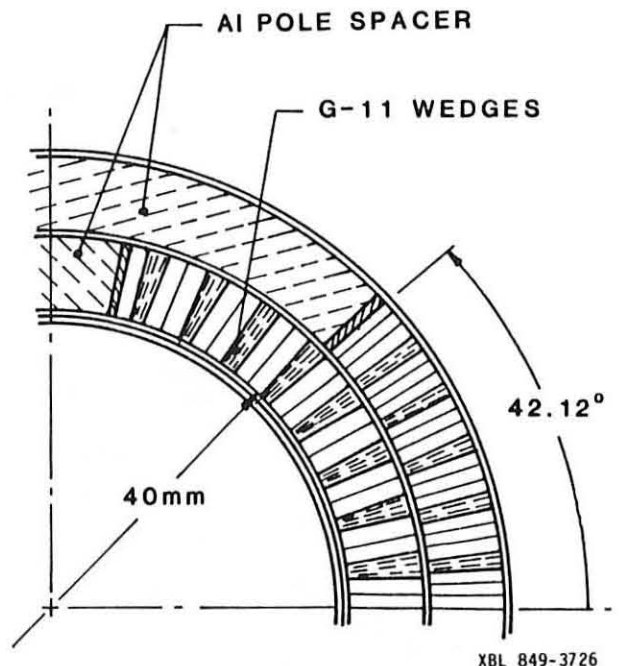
D-12-A Winding Cross-Section (Rectangular Cable).
